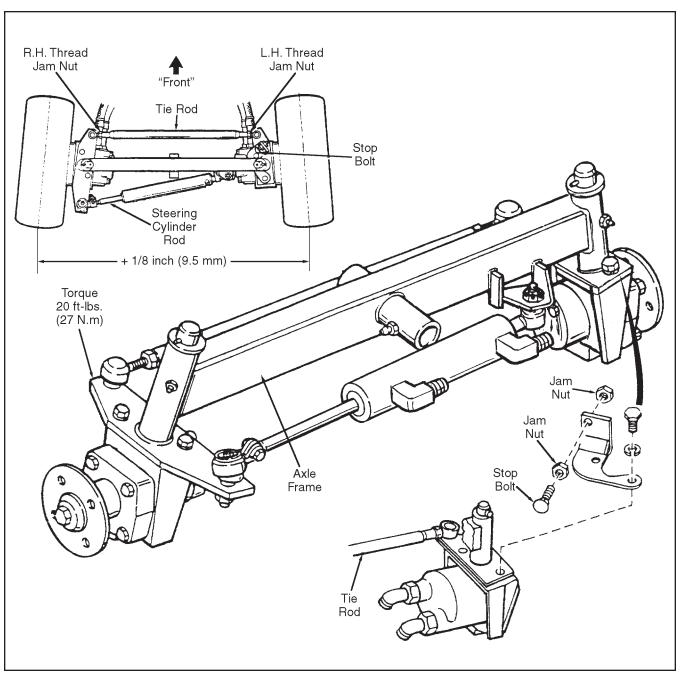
D-2. 4 Wheel Drive Steer Wheel Adjustment
